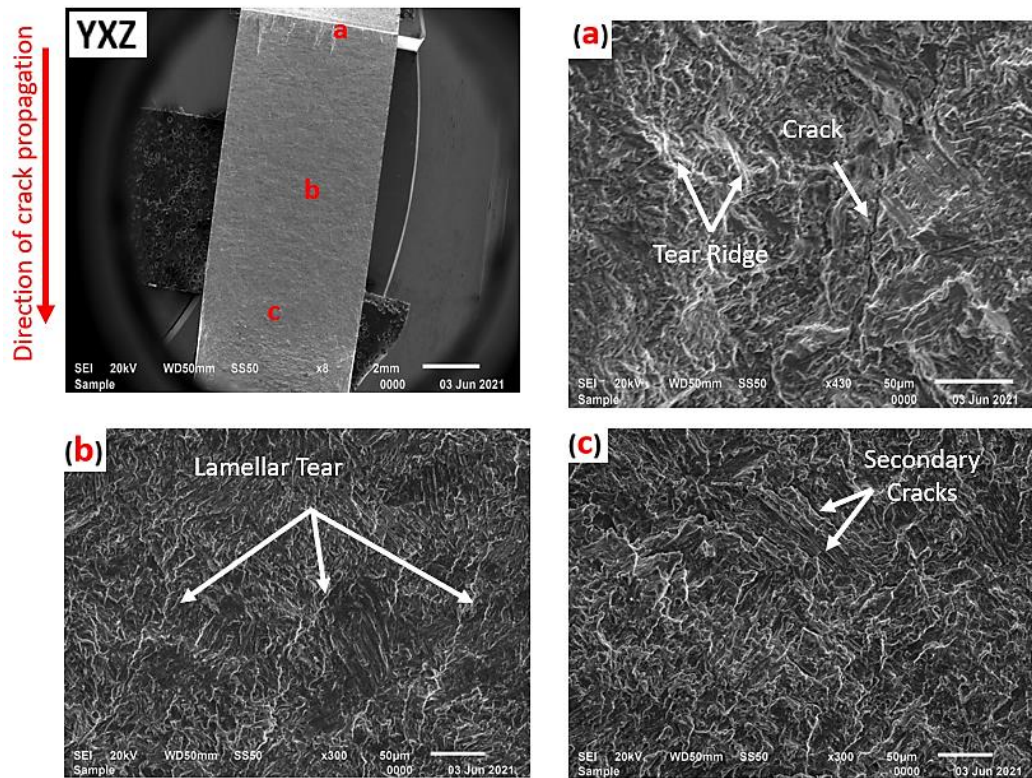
13. Representative SEM images of the fracture surfaces of YXZ FCGR specimens indicating the (a) crack initiation section, (b) crack propagation area, and (c) final fracture region
